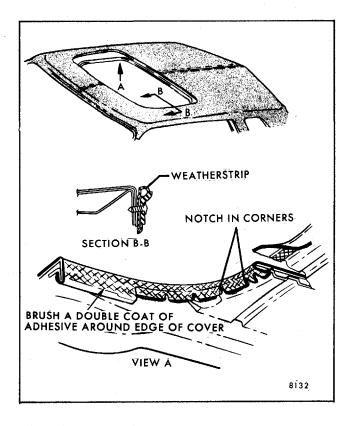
Fabric Roof Cover Installation - Sun Roof Option
